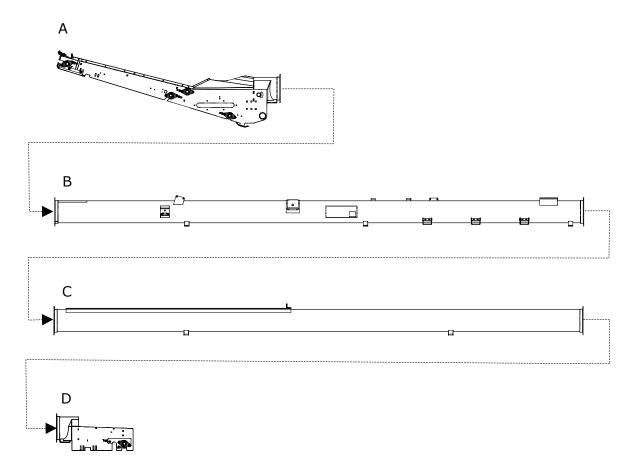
Conveyor Tube Layout for CX³ 1549 Model
